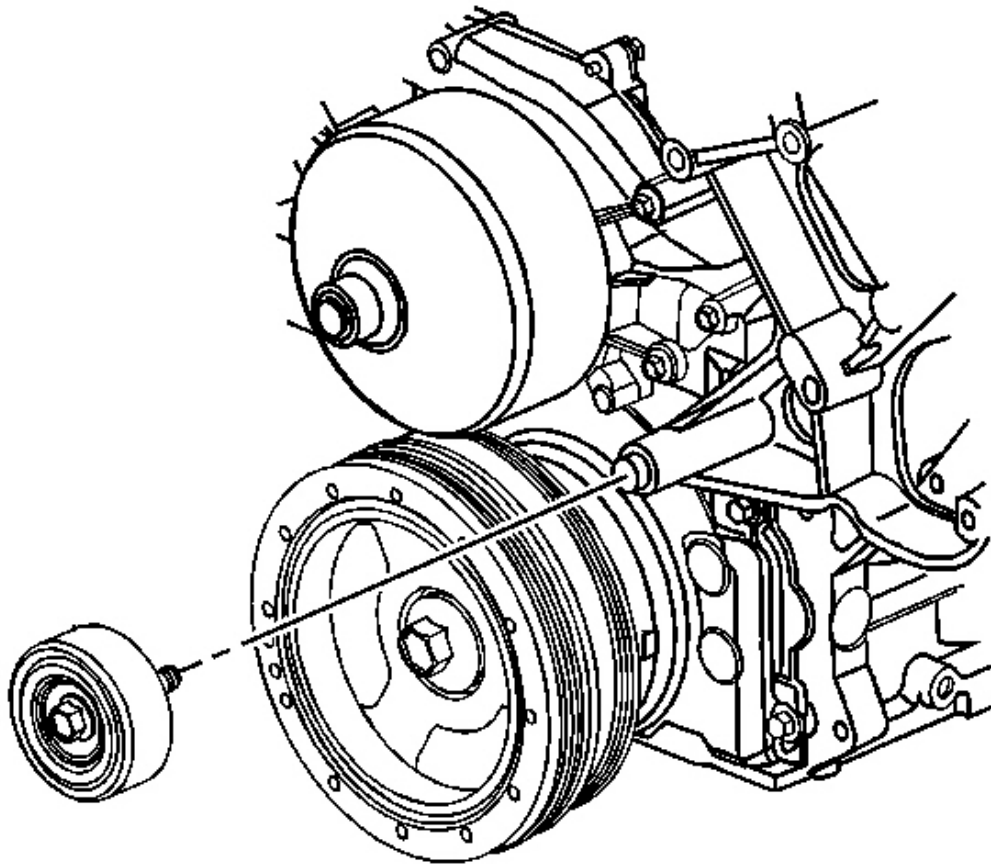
Accessory Drive Belt Idler Pulley Bolt
